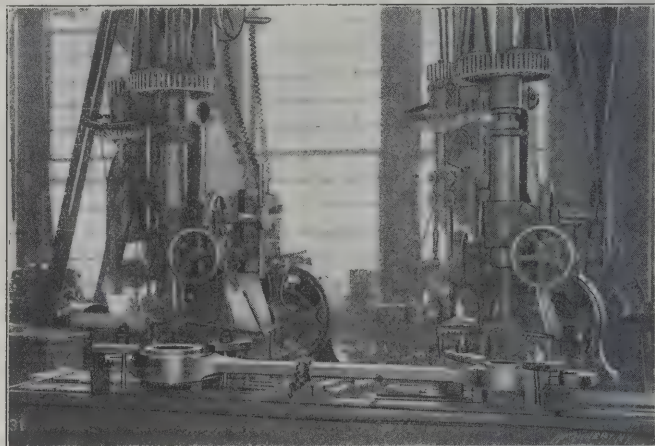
Re-boring the Bushings in the Intermediate Rods after pressing them into Place
